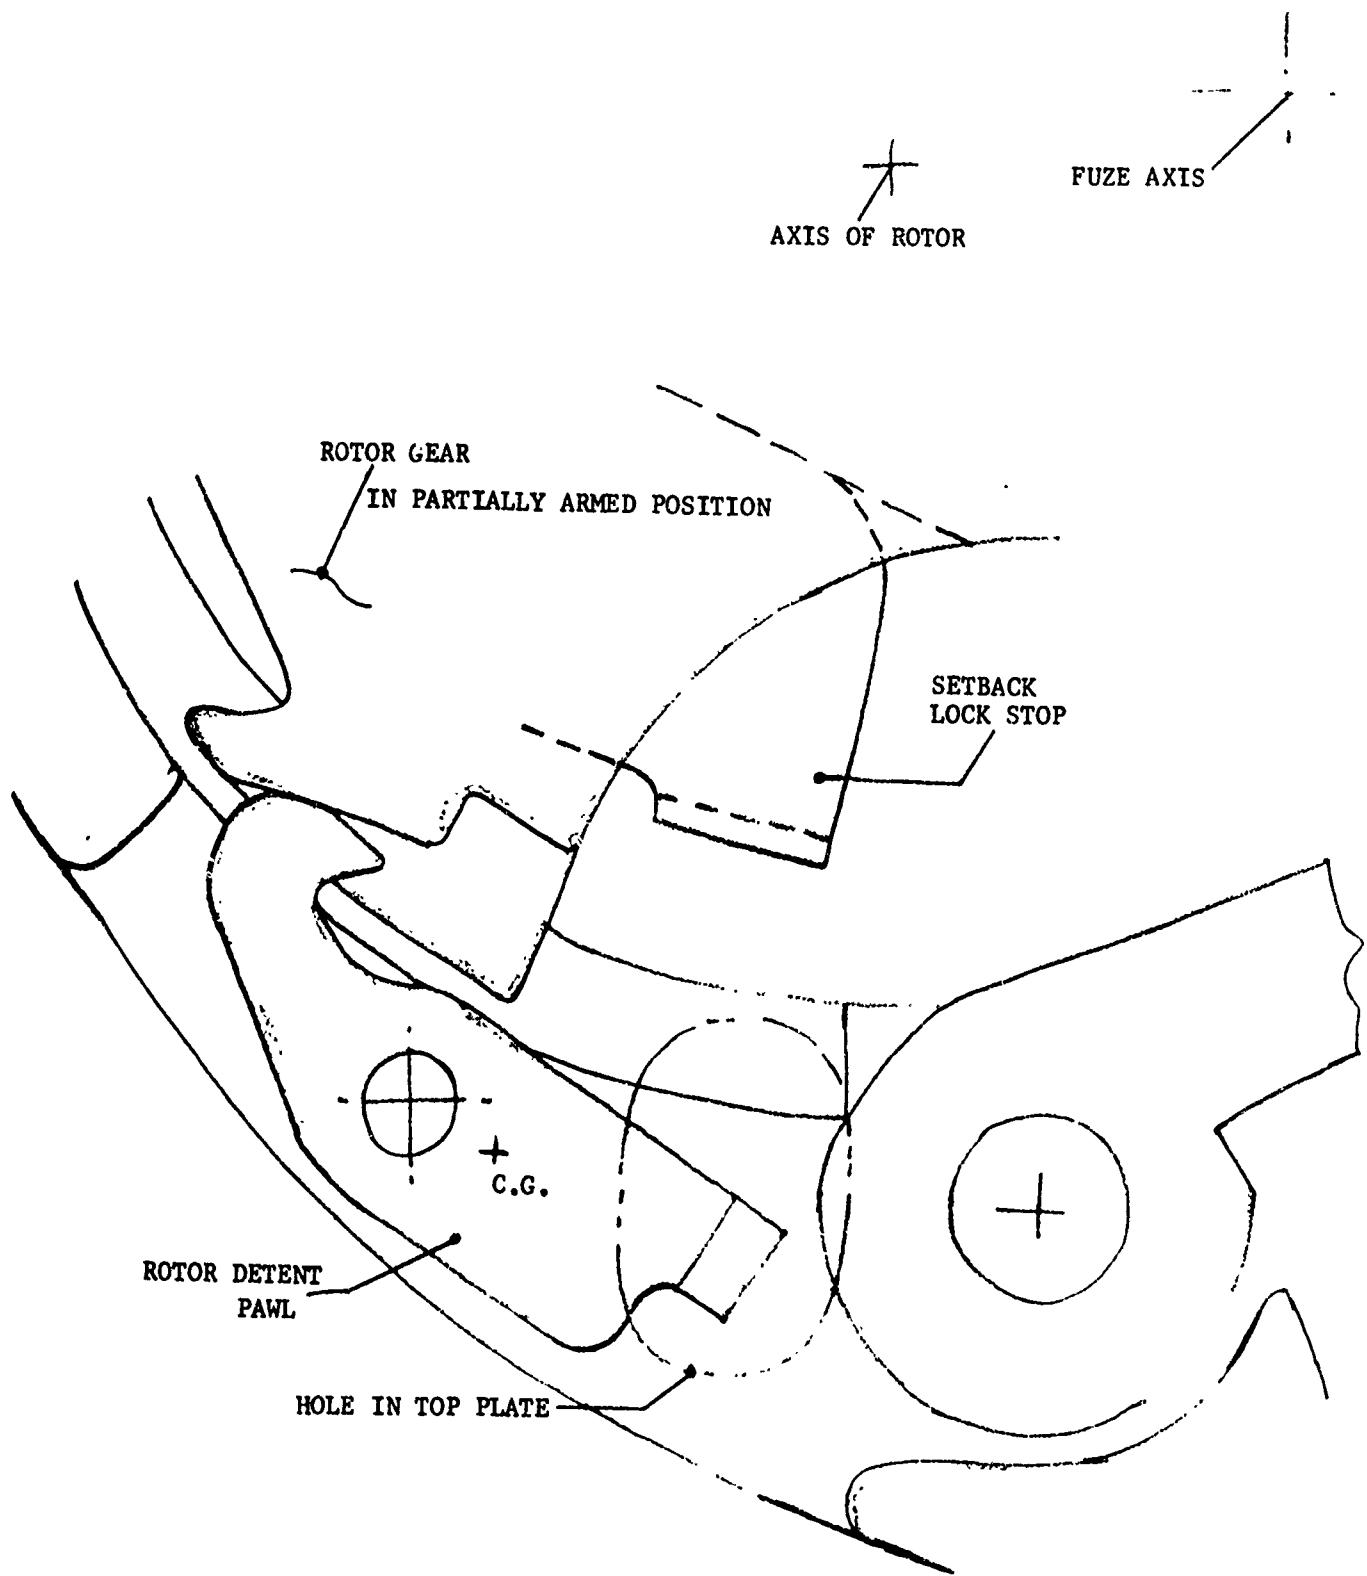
ROTOR DETENT DETAIL - ROTOR PARTIALLY ARMED
